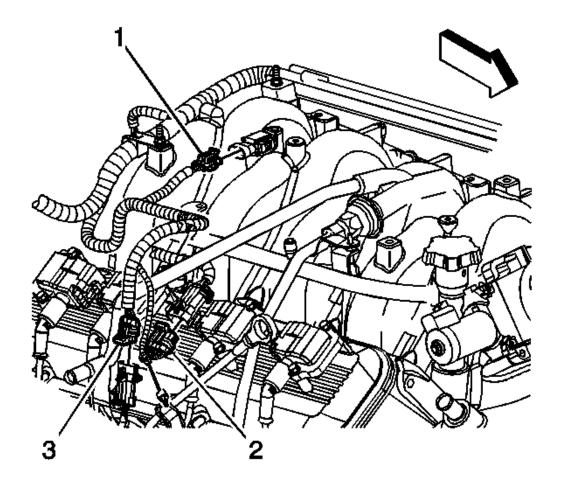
View Of Ignition Coil, ECT And MAP Sensor Electrical Connectors Courtesy of GENERAL MOTORS CORP.
